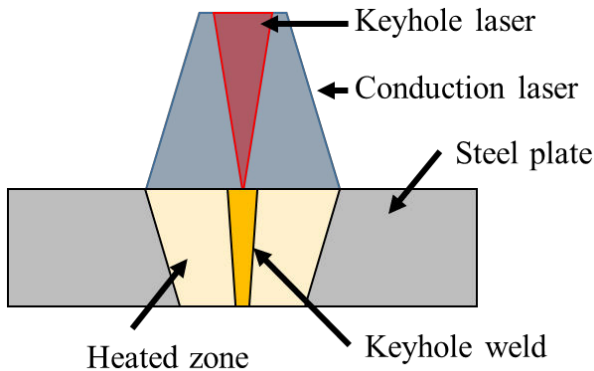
Schematic of hybrid laser-laser welding.
